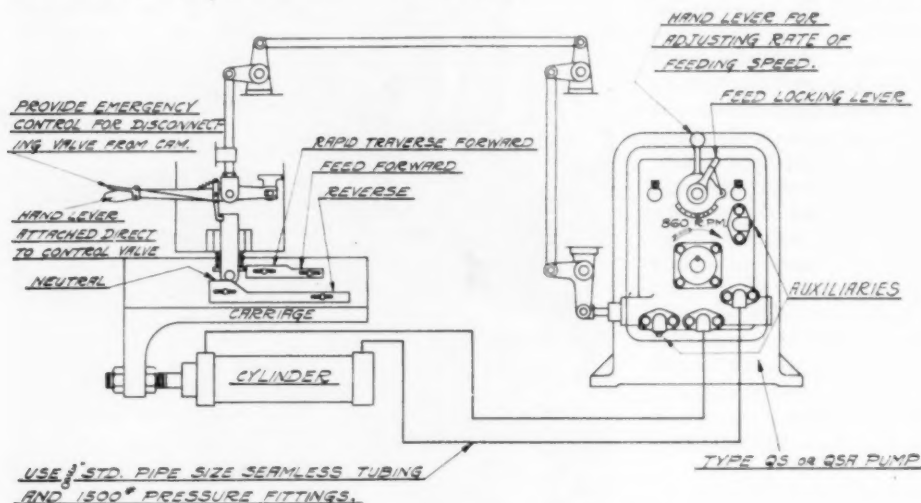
METHOD OF OPERATION OF CONTROL-VALVE STEM
